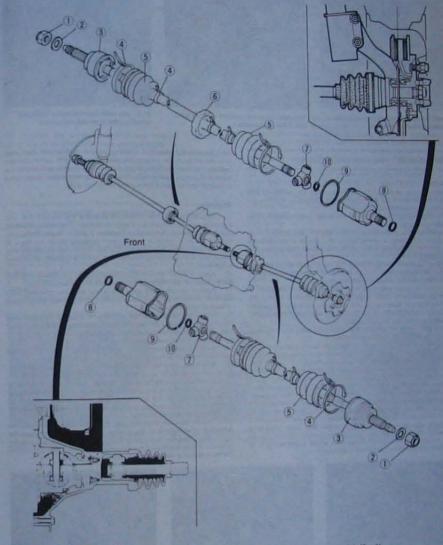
Layout of the driveshaft assemblies and related components - later automatic transmission models (Sec 1)
